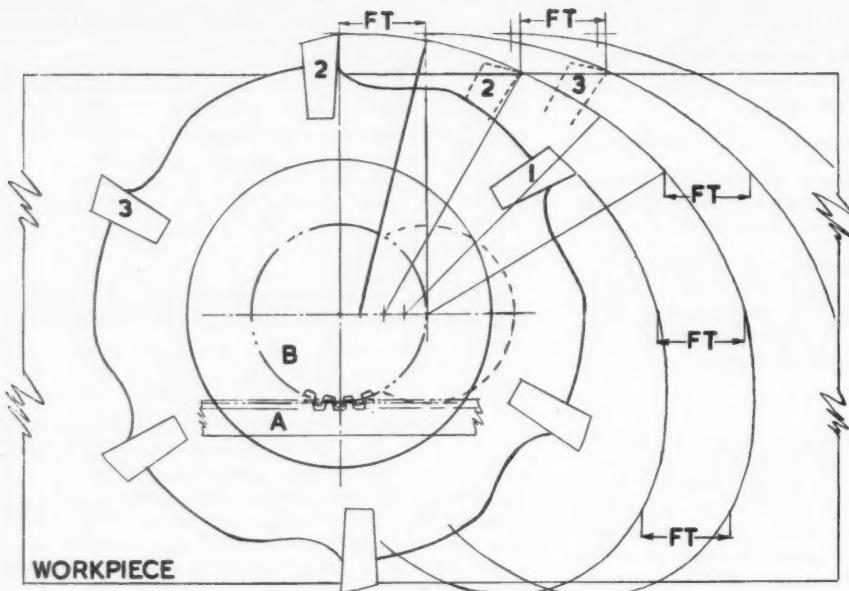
Conventionalized representation of tooth path generated by side and face milling cutter. The cutter is presumed to be rolled by the action of rack A and pinion B. The feed per tooth or "chip load" is indicated by the constant dimension FT.
